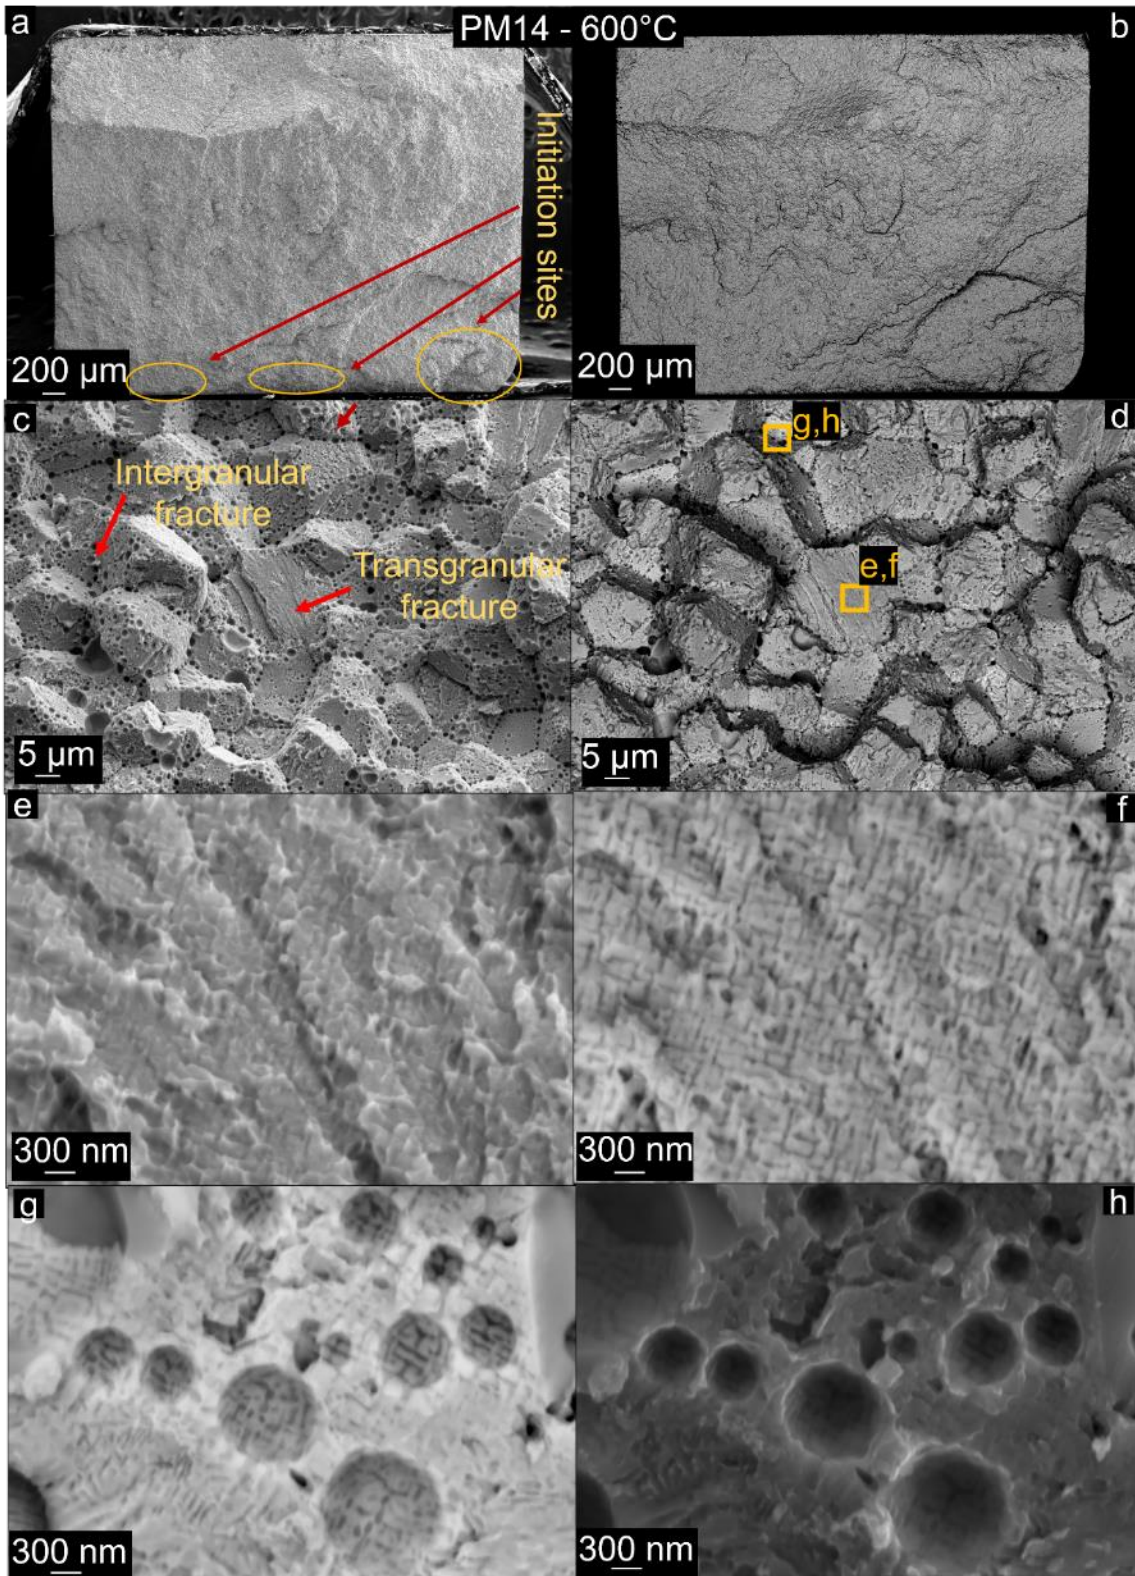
SEM micrographs of fracture surfaces of PM14 bending specimens. The compression side is upwards, while the tension side is downwards and has grinded edges. a,b) Typical fracture surface morphology using SE and BSE detectors, respectively. c,d) Enlarged view of the microstructure in SE and BSE modes. e,f) Further enlarged views of the micromorphology of the area shown by the rectangle in (d) in SE and BSE modes, respectively. g,h) Area exhibited by the rectangle in (d) in SE and BSE modes, respectively.
